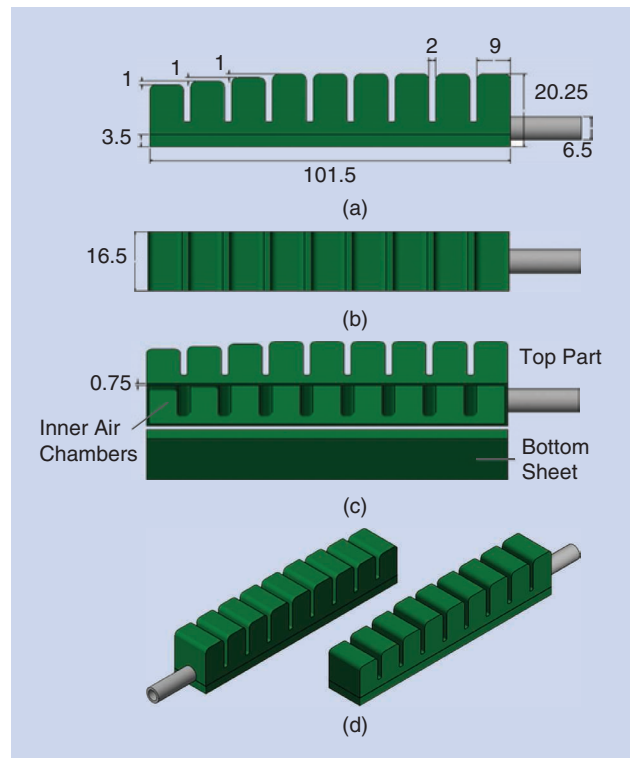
The design of the SH BSPA, which is completely constructed out of a DPBM-FT5000-r0.5 polymer: the (a) side, (b) top, (c) exploded, and (d) 3D isometric views. The dimensions are in millimeters.
